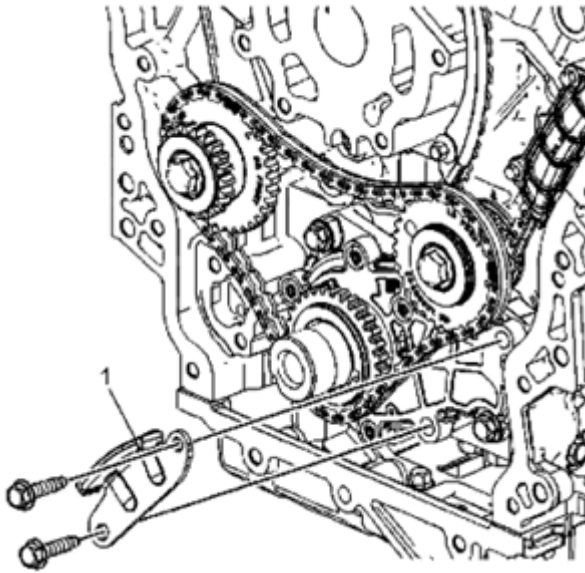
Identifying Timing Chain Tensioner Adjuster No. 2 And Gasket
